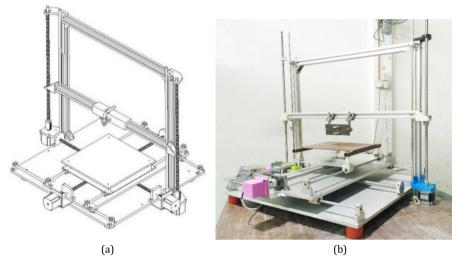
Comparison between the CAD design (a) and the actual newly developed low-cost 3D metal printer (b)
